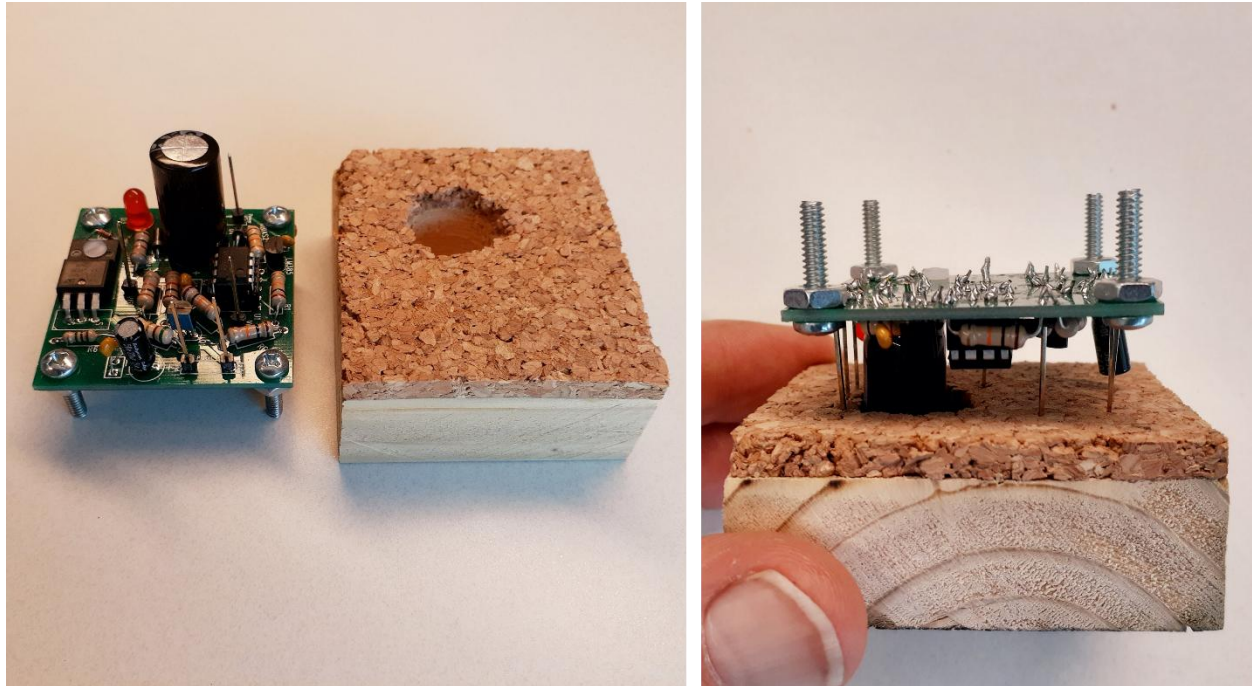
Solder Fixture to Hold the Long Header Pins for Soldering.
